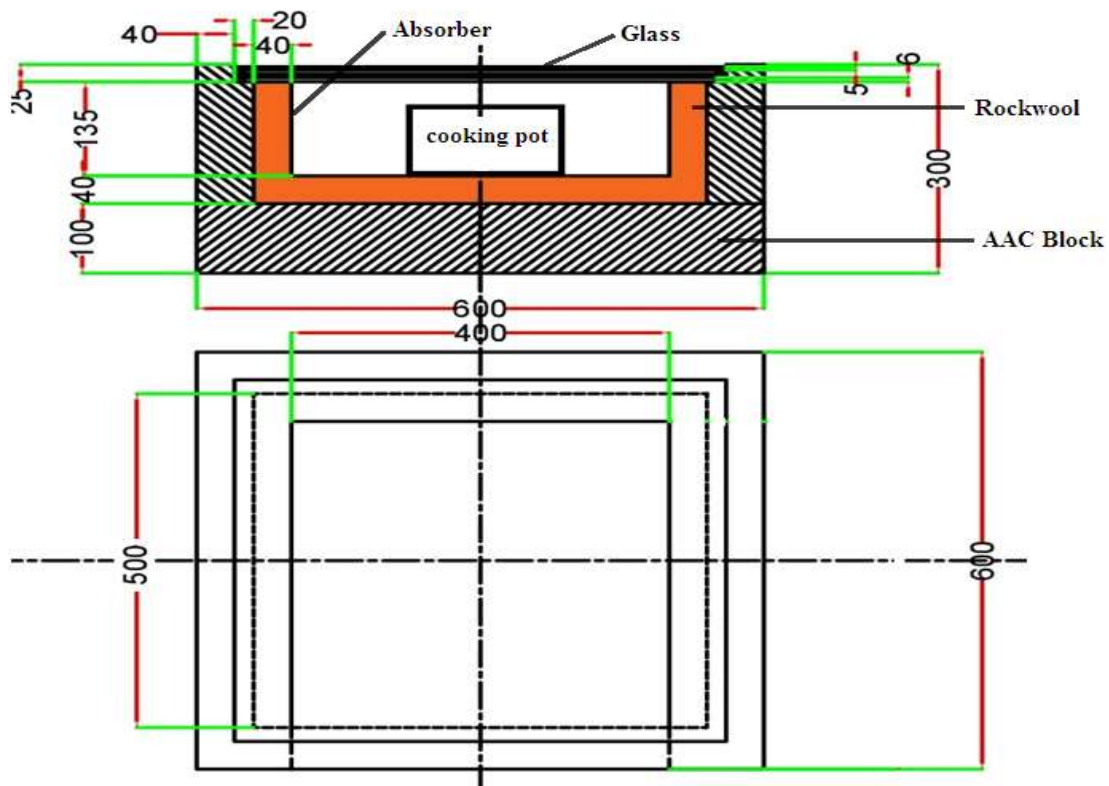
(a): Sectional Front View and Top View of AAC Box type Solar Cooker.
